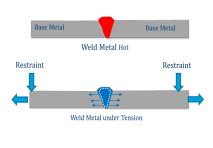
Tensile residual stress during cooling of weld metal
